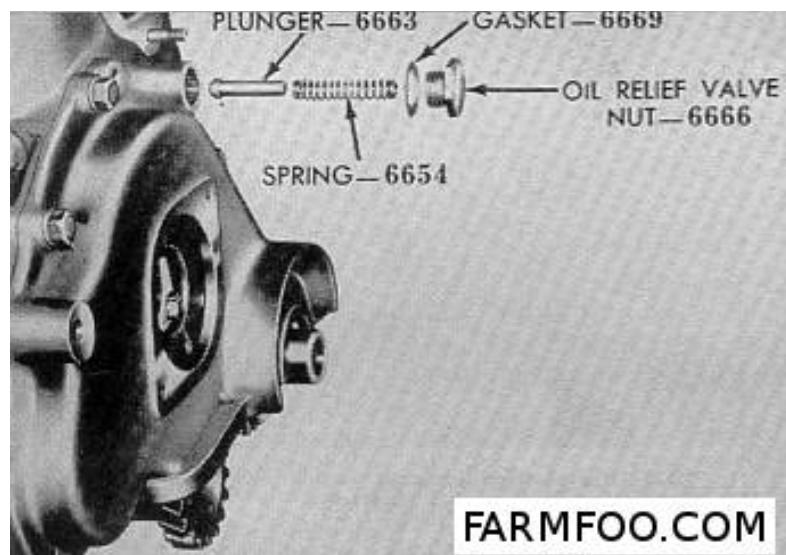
Disassembled view of engine oil pump used on models 2N-8N-9N.
